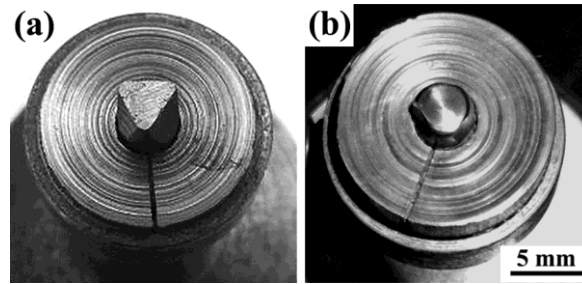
The morphologies of welding tool (a) before and (b) after welding all $B_4Cp/6061Al$ samples with a welding distance of ~ 1200 mm.
